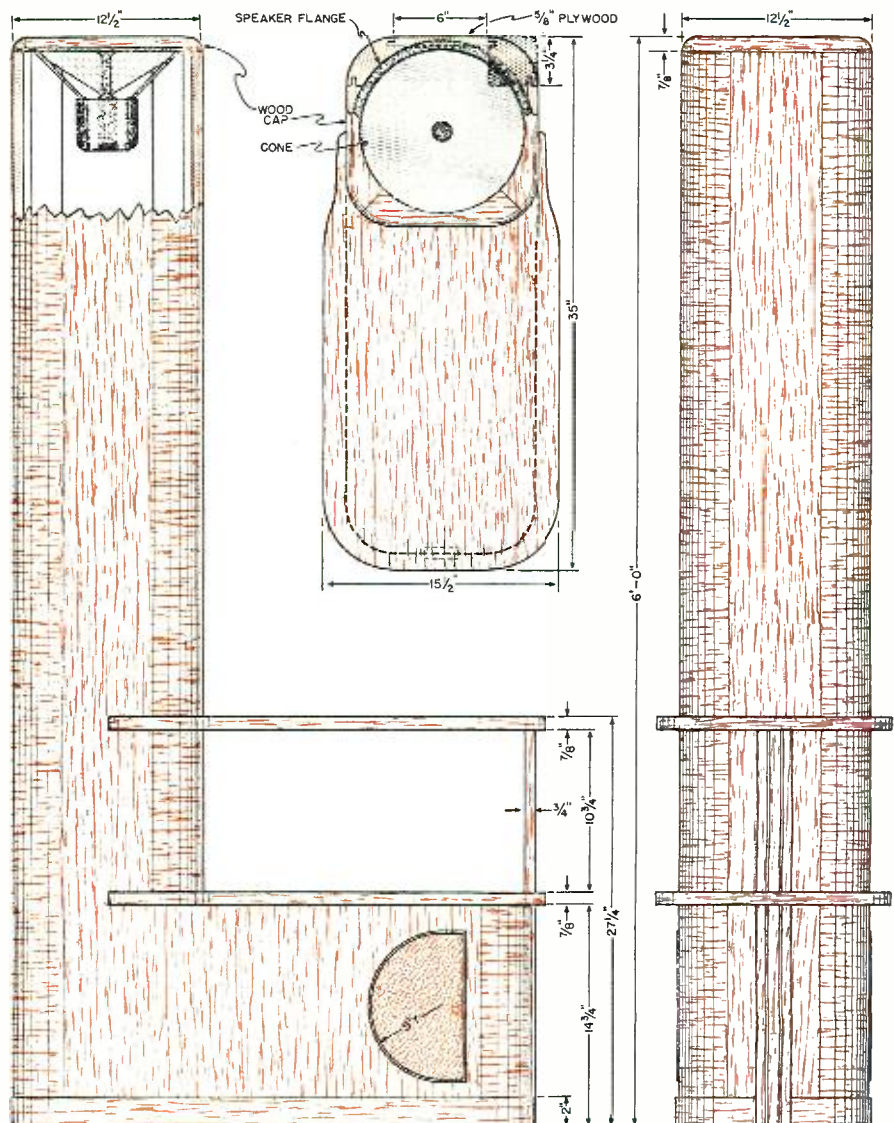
Mechanical layout of the unit, showing all necessary dimensions.
